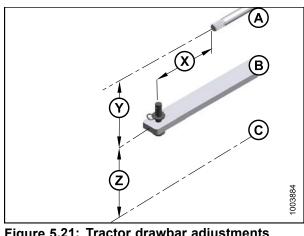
Tractor drawbar adjustmentsA - PTOB - Tractor drawbarX - Dimension XY - Dimension Y
